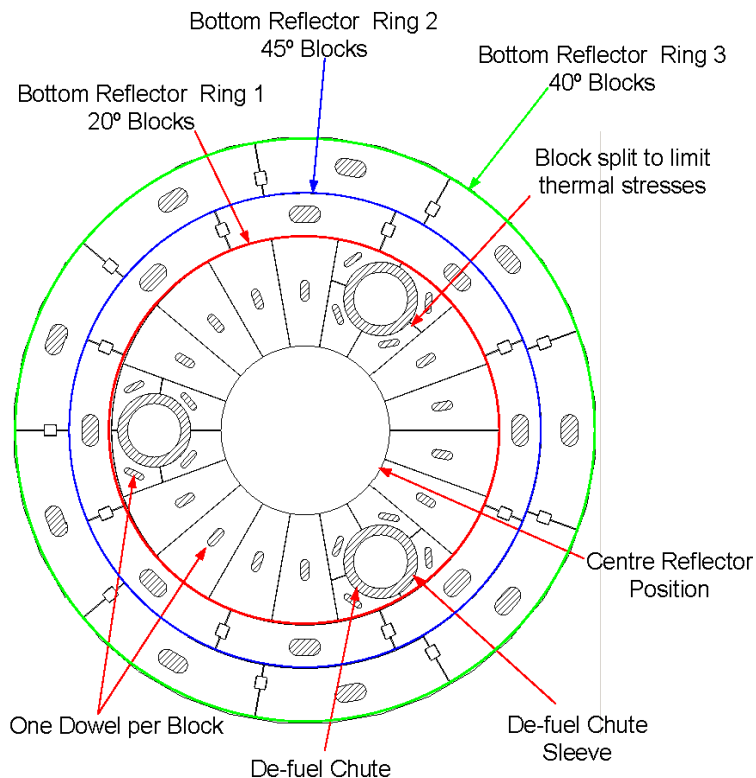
Bottom Reflector Horizontal Section Showing Typical Insulation Layers [4]
